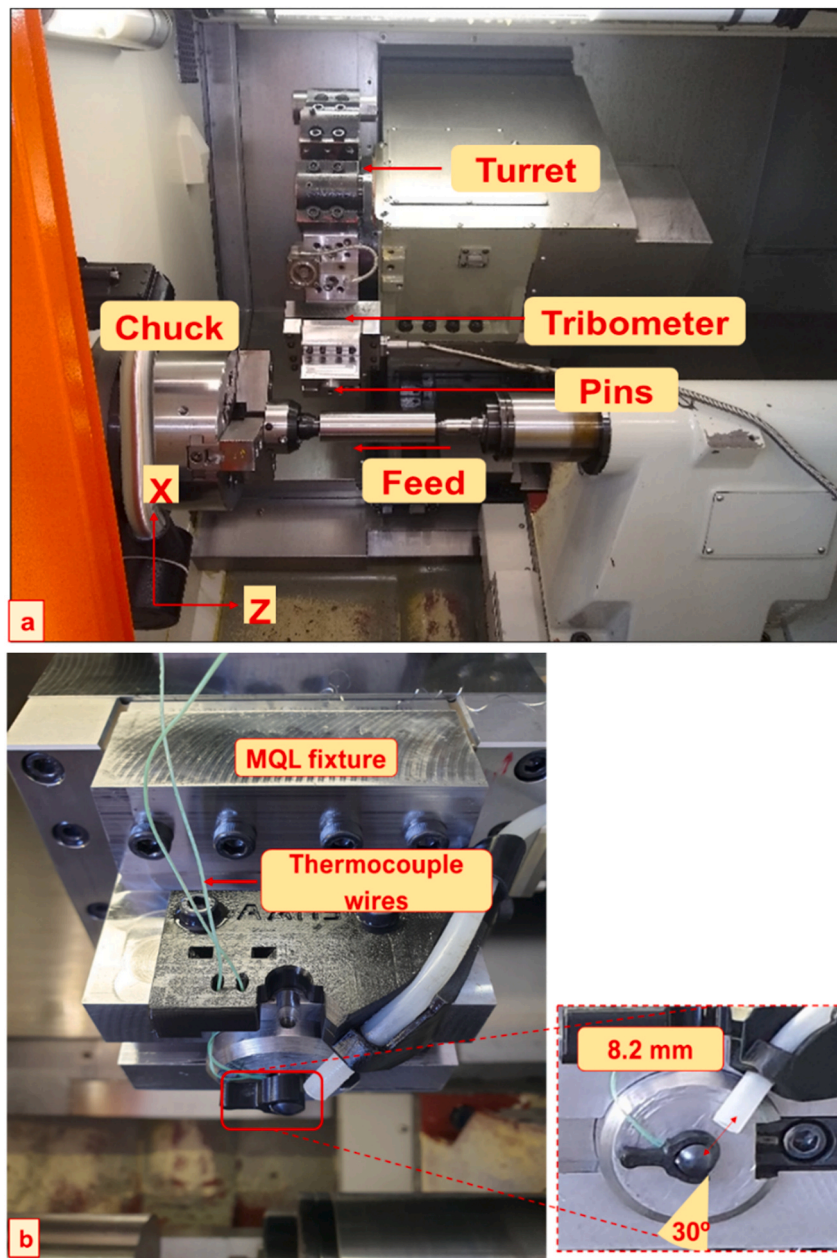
The experimental setup showing (a) Pin-on-Cylinder Tribometer for dry and flood conditions (b) Special fixture for MQL lubricants.
